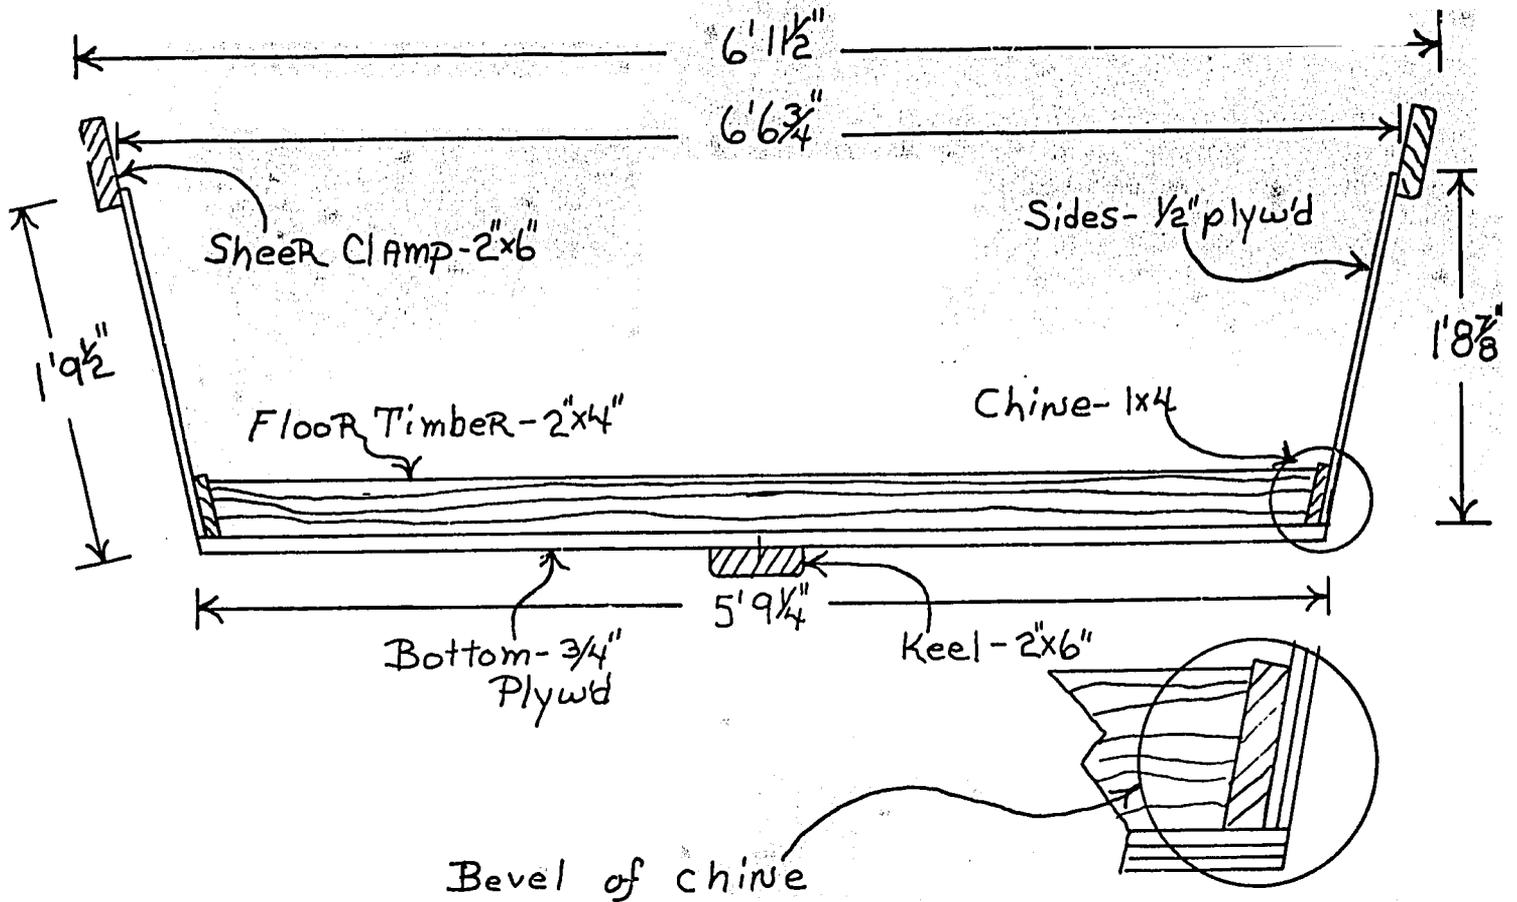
CHINE-FLOOR TIMBER ASSEMBLY
